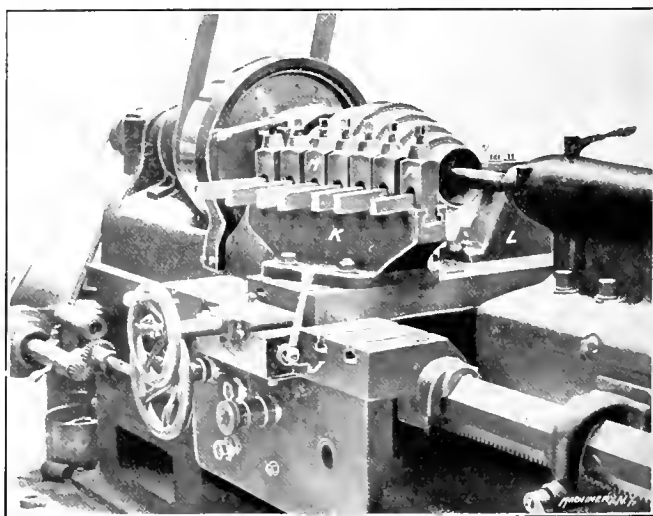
Lathe with Special Forming Attachment and Tool-holder for Turning Cone Pulleys.
